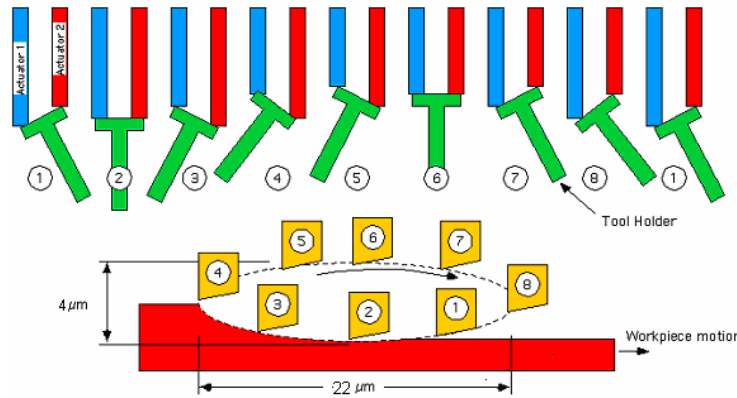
Ultramill Vibration-Assisted Machining Concept.
